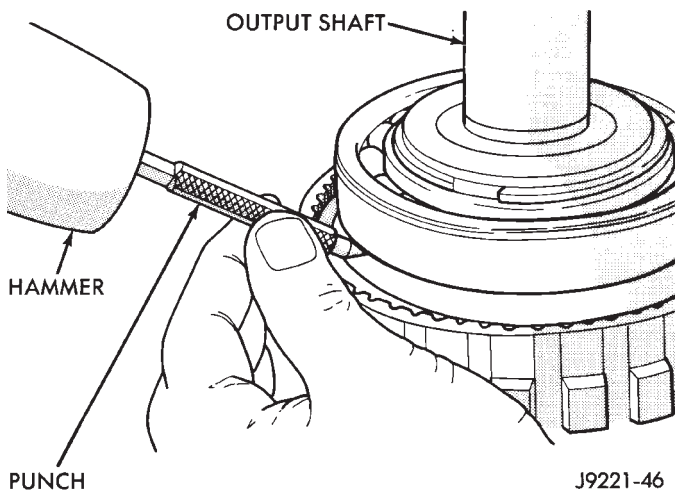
Marking Annulus Gear And Output Shaft For Assembly Alignment
